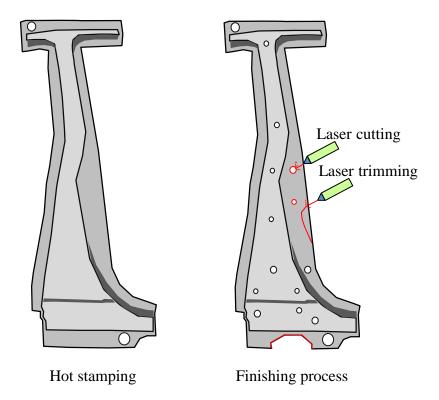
Laser cutting and laser trimming on die-quenched centre pillar after hot stamping.
